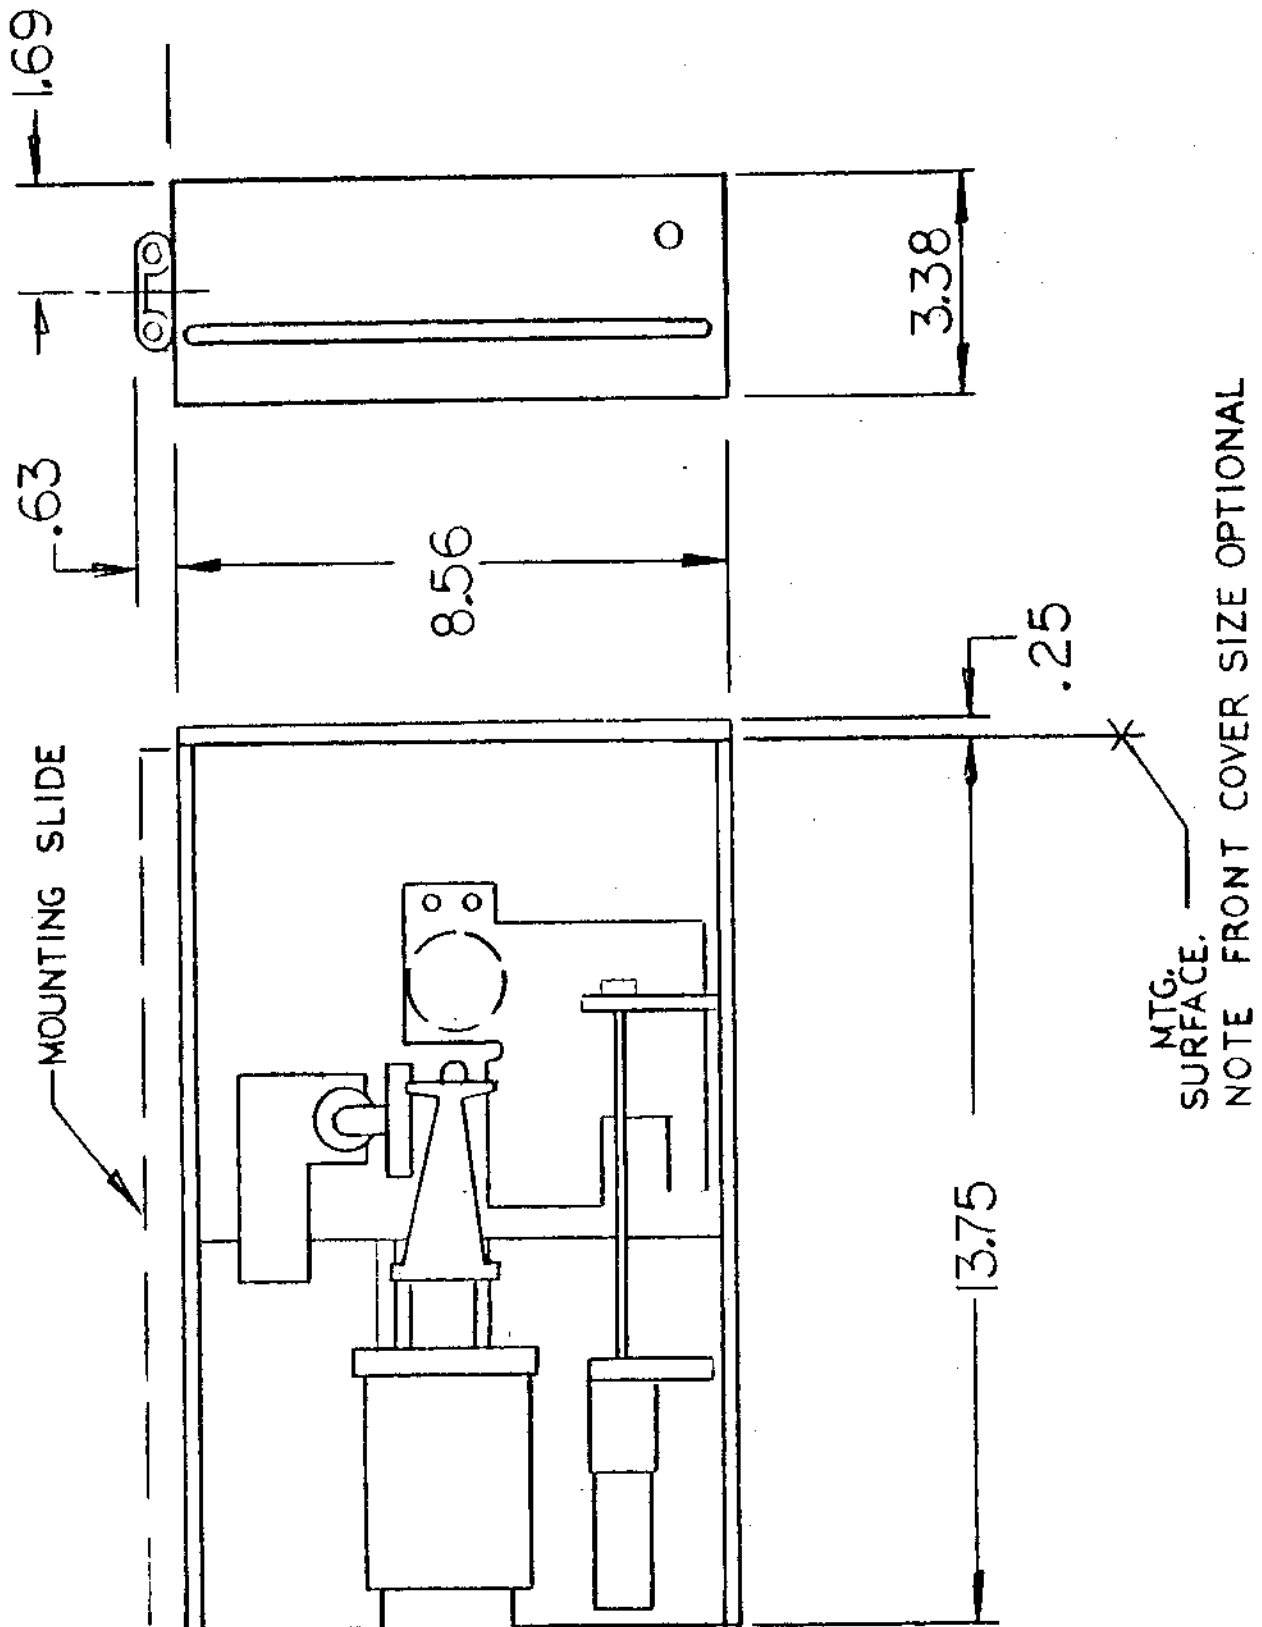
MODEL 70 OUTLINE DIMENSIONS
